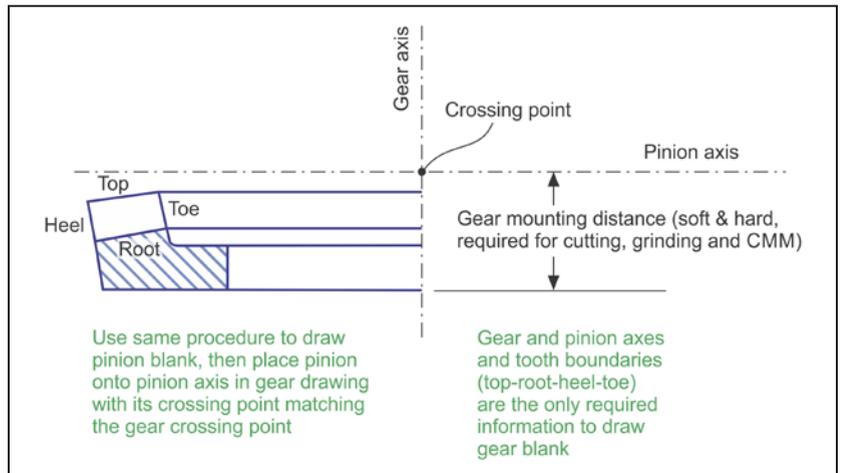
Fit the tooth and the gear or pinion body and define the mounting distance.
